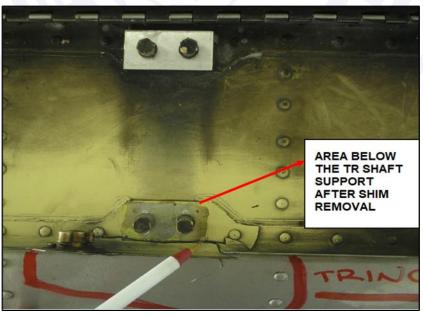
Crack located below the tail rotor drive shaft support.
